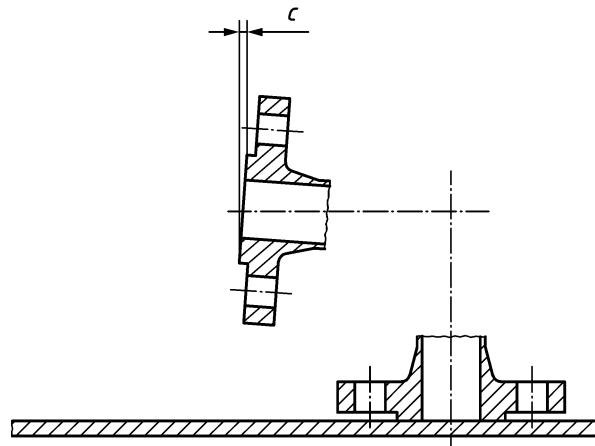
Tolerances on parallelism and perpendicularity
